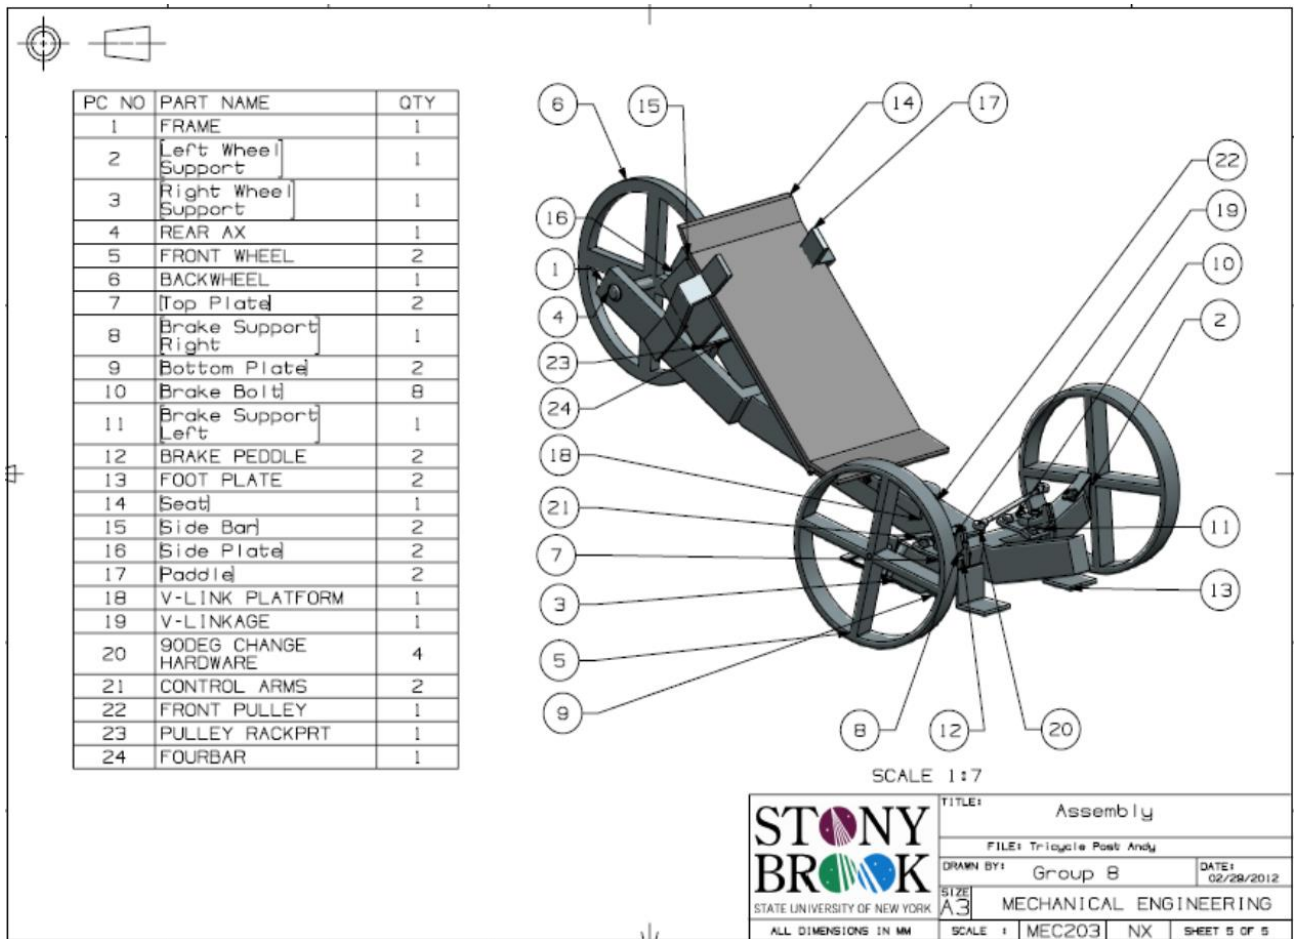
CAD Drawing of the Assembly of Assistive Recumbent Tricycle.
